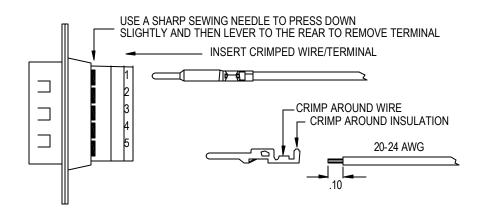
Installing D-sub terminals and inserting into housing. Crimp terminals only, do not solder. Be sure to install the black shell nut over the cable before inserting terminals into housing.
